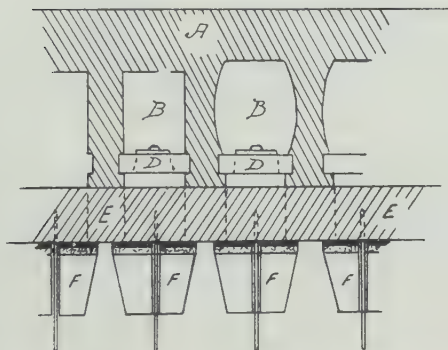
FRONT ELEVATION OF CAVITY BOARD
